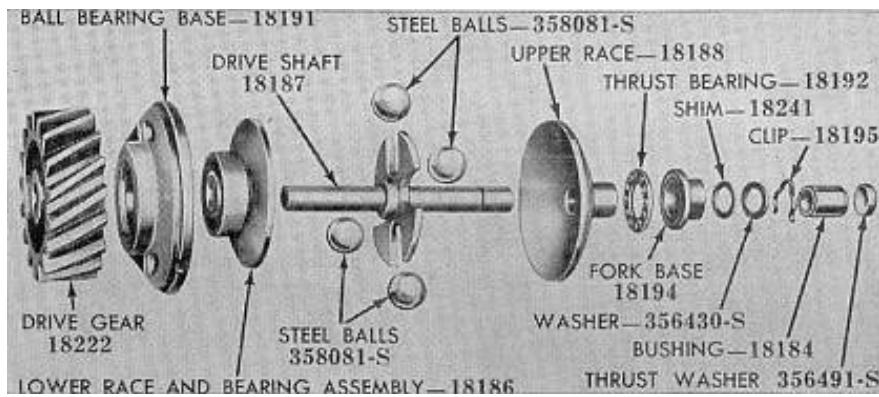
Exploded view of engine speed governor used on models 2N-8N-9N.
